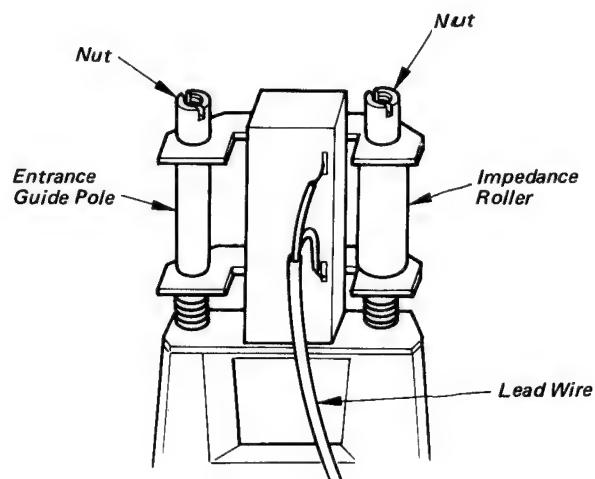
Wiring the Fully Width Erase Head Assembly Around
